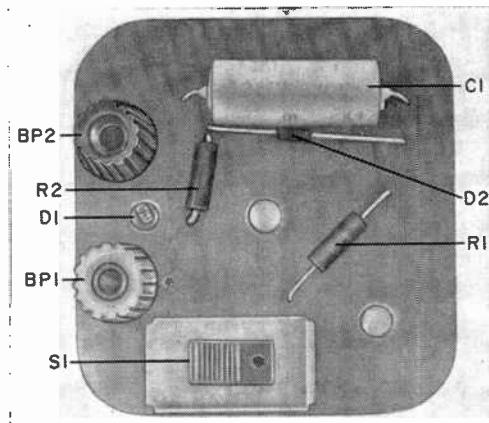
At the right is actual size printed circuit board etching guide. Component location is in photo above.
